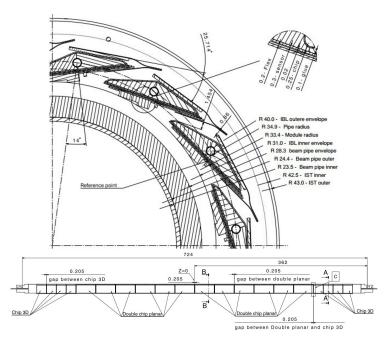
One quadrant cross-section of the IBL (top) and the top view of one stave (bottom). All dimensions are given in mm [2].
